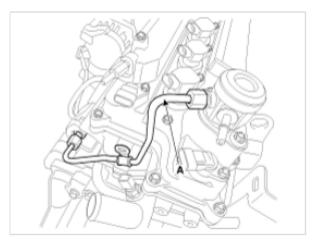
Identifying Vacuum Pipe Assembly Courtesy of HYUNDAI MOTOR AMERICA
